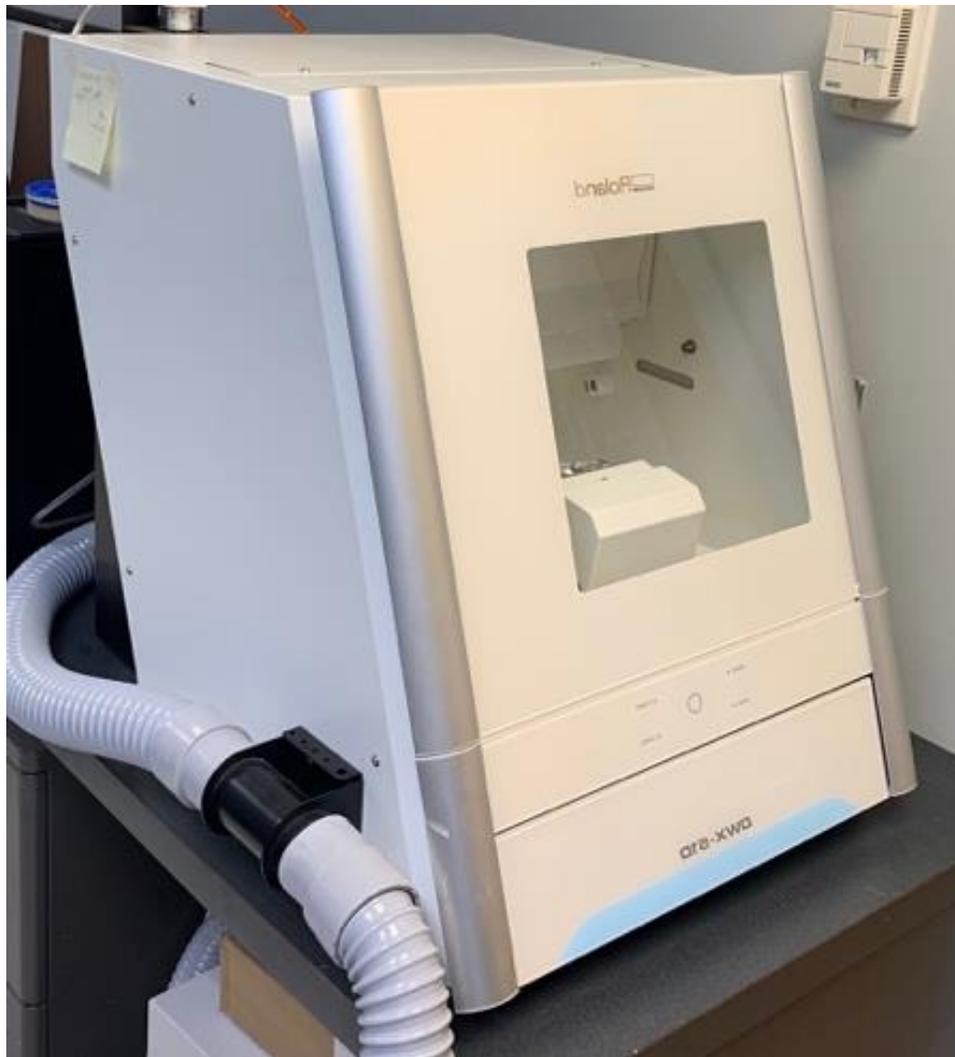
Roland DWX-51D 5-axis dental mill. The milling unit used for production of subtractive manufacturing specimens.
